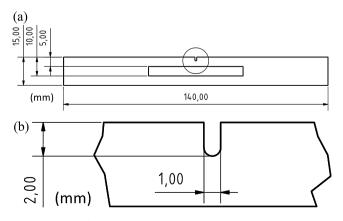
Dimension of the test mock-up geometry. (a) Whole cross section and (b) notch.
